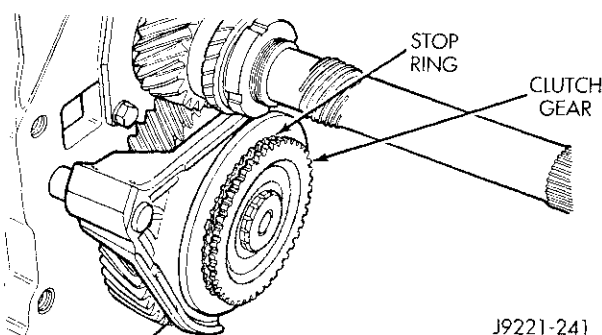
Fifth Synchro Clutch Gear And Stop Ring Installation
